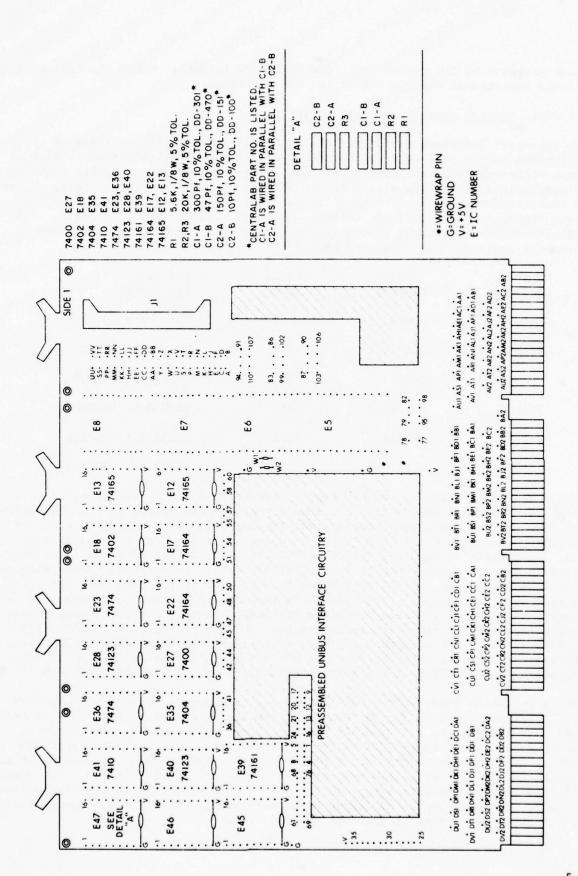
Universal Interface Board, Parts Layout Diagram and Parts List
